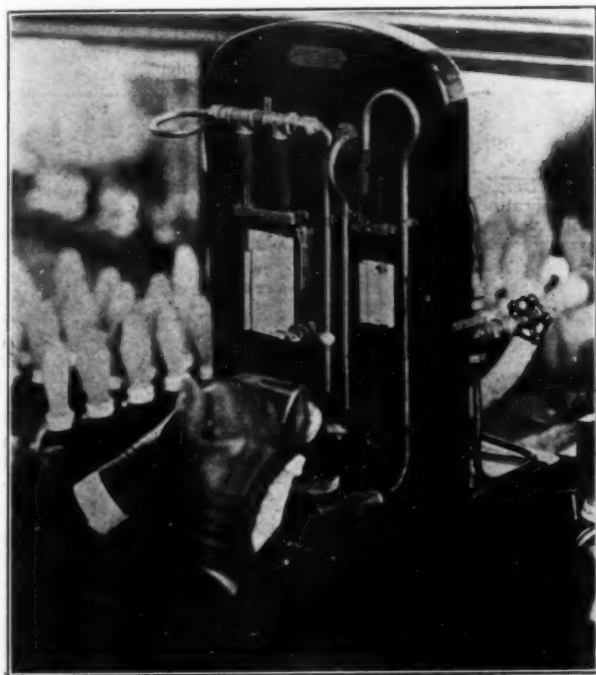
FLUTTER VALVE LEAKAGE-TESTING APPARATUS.
